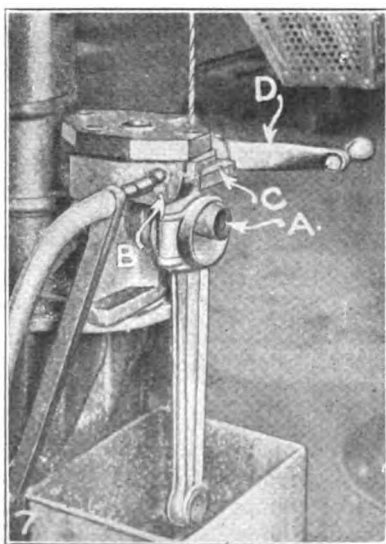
DRILLING HOLE IN OIL SCOOP. FIG. 8. DRILLING BOLT HOLES. FIG. 9. SLITTING ROD AND MILLING OIL SCOOP
